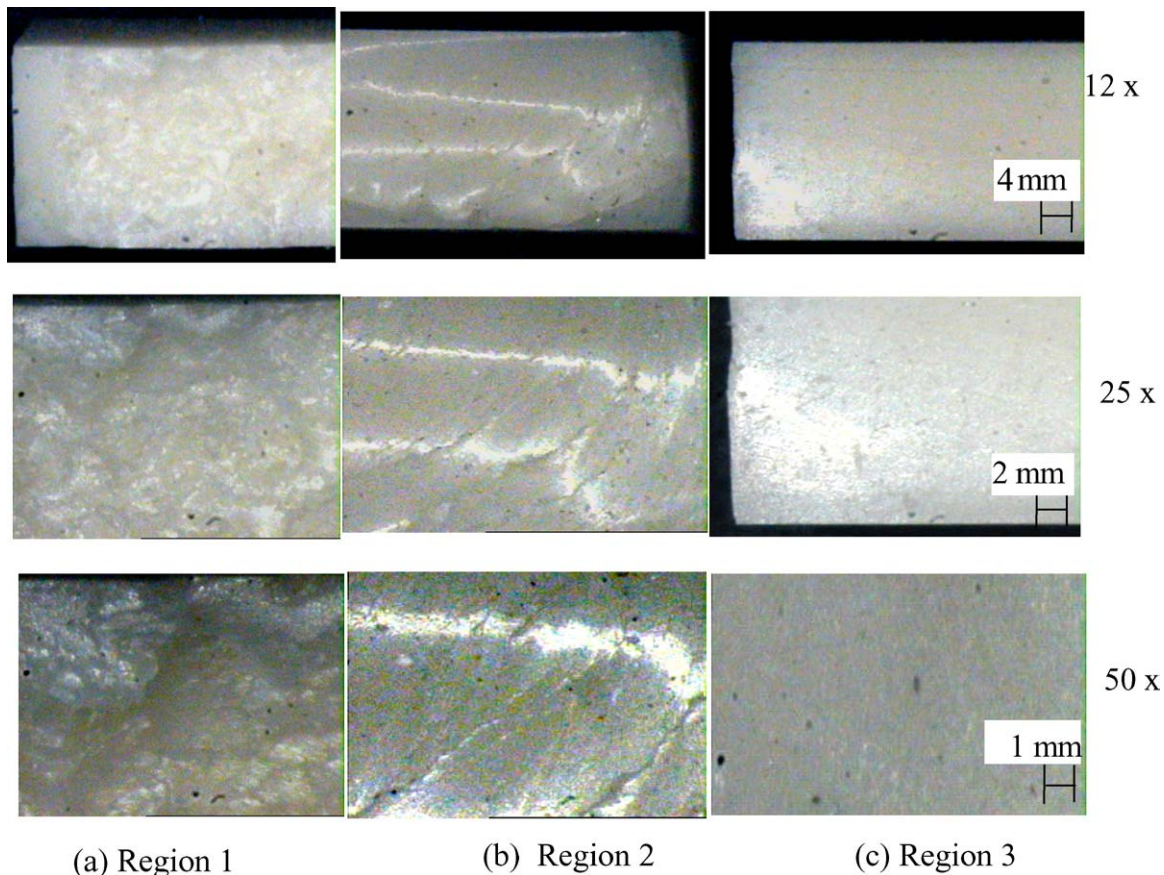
Fracture surface of tensile specimen in three phases.
